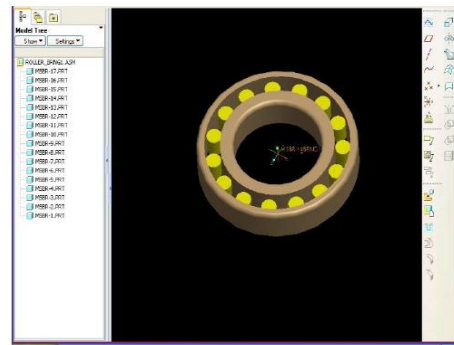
Modeling of Cylindrical Roller Bearing using pro-e
